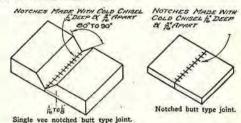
In welding aluminum it is often found desirable to notch the edges to be welded to assist in securing thorough fusion.
